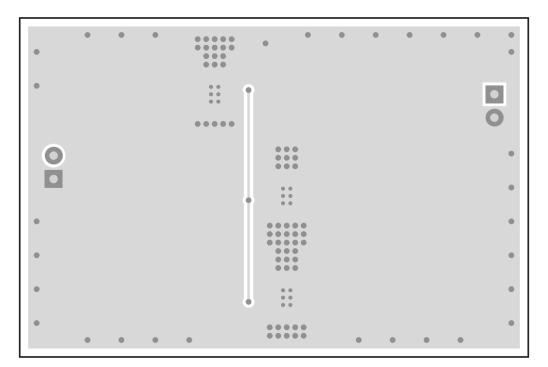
LDO Parallel Design EVM Bottom Layer Routing
